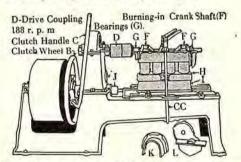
A burning-in machine. Burning-in the main crankshaft bearings on a Ford engine. A belt drives the fly wheel. The power is then transmitted through a clutch to the gearing, thence to coupling (D), which drives the crankshaft (F) at 188 r.p.m. The same operation is used for burning-in the lower connecting rod bearings. The base (I) permits the pistons to pass the cylinder block slightly when burning-in the connecting-rod bearings. (See footnote, page 803, as to where shop equipment of this kind can be obtained.)
